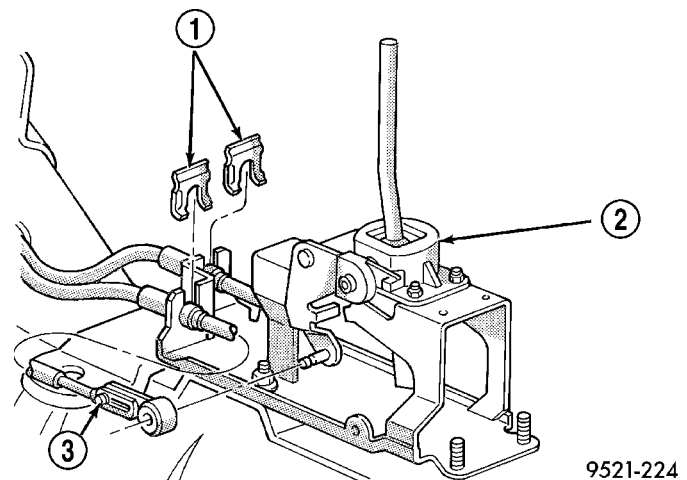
Crossover and Selector Cables at Shift Mechanism
